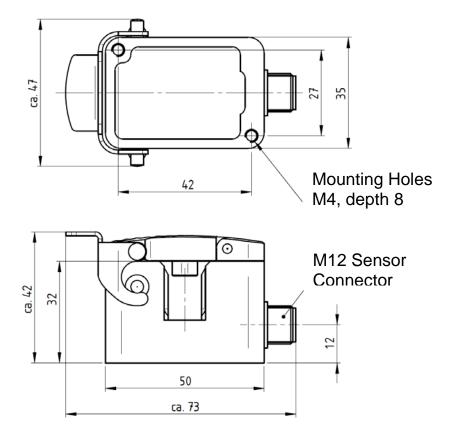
Drawing of sensor model S. Note: The drawings do not conform to real dimensions.
